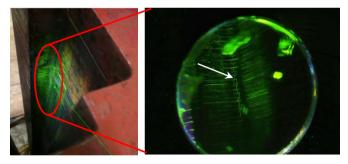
Typical crack indication after grinding at the rotor rim area. Detail picture observed through a mirror.
